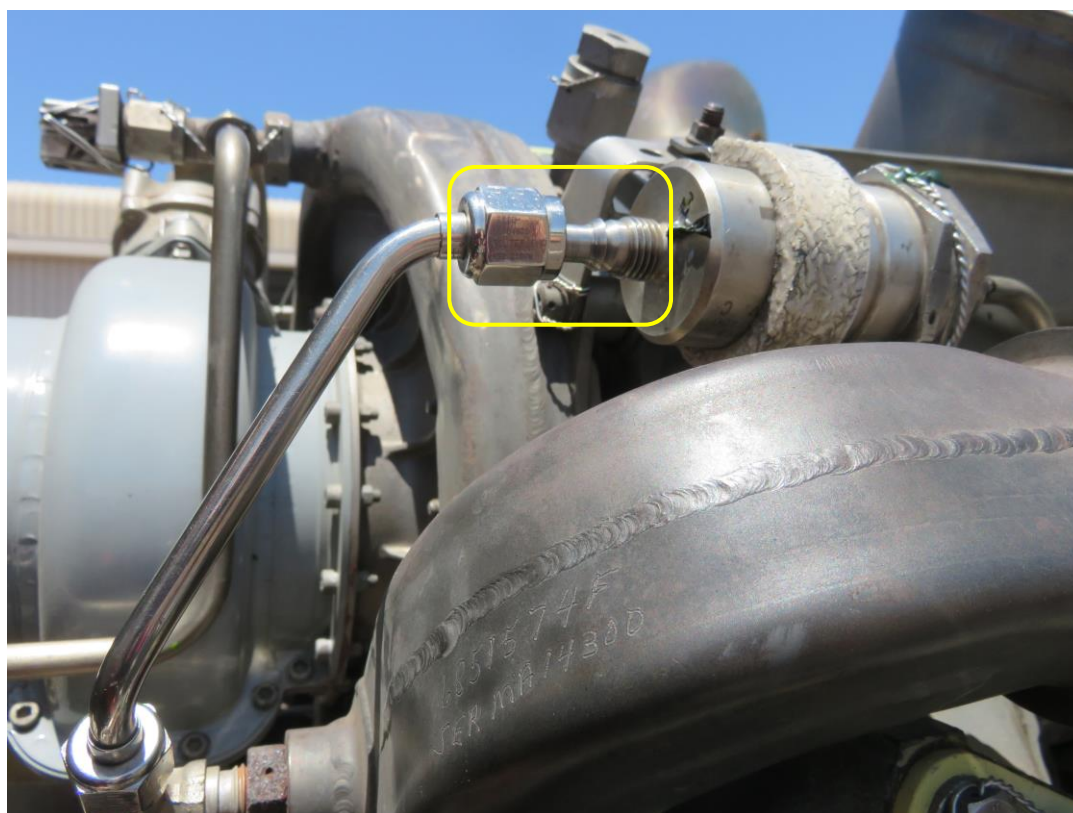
The new Pc tube connected with the short end to the compressor scroll.
